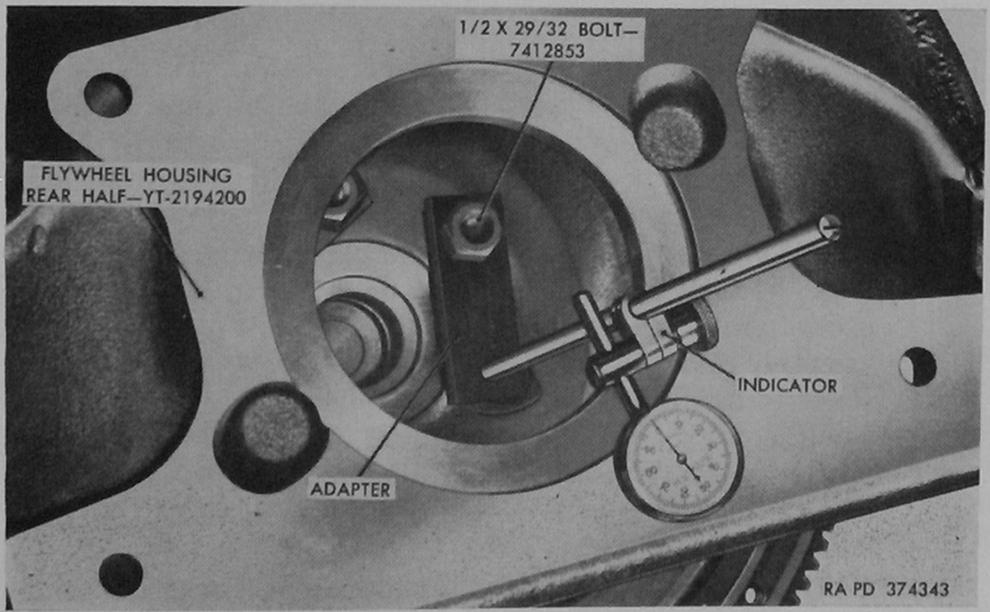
Checking squareness of rear face of flywheel housing rear half—engine assemblies 7411599 and 8329440.
